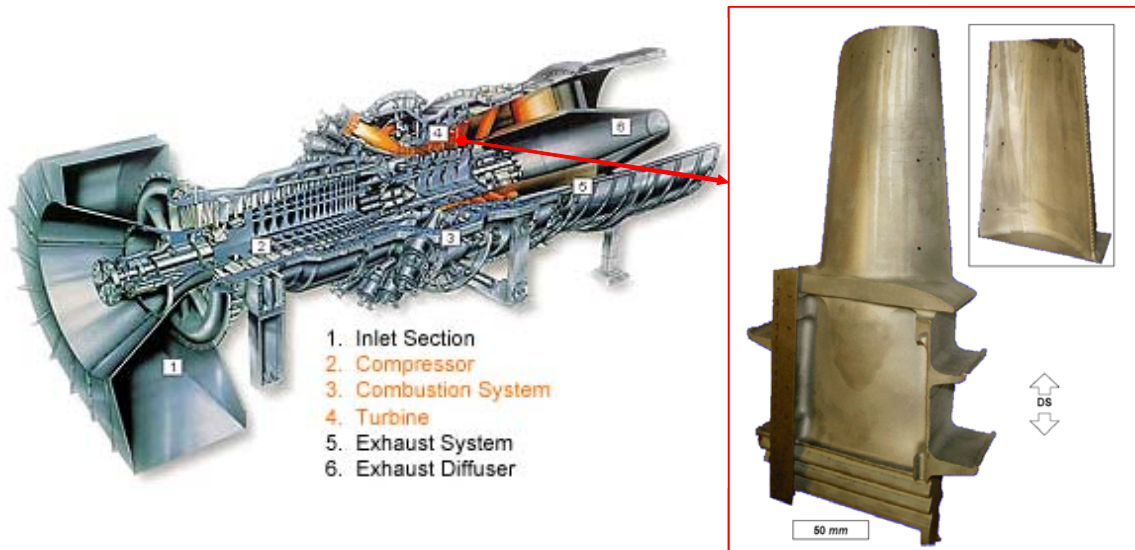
Gas turbine longitudinal layout and blade geometry [2].
